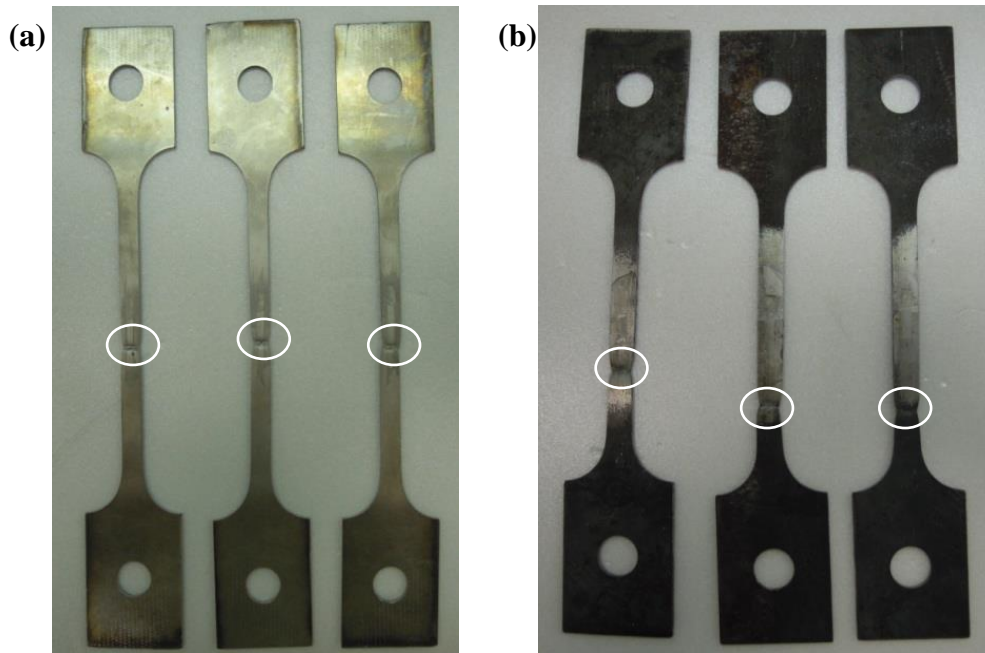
Coupons after tensile test: (a) stainless steel (b) mild steel
